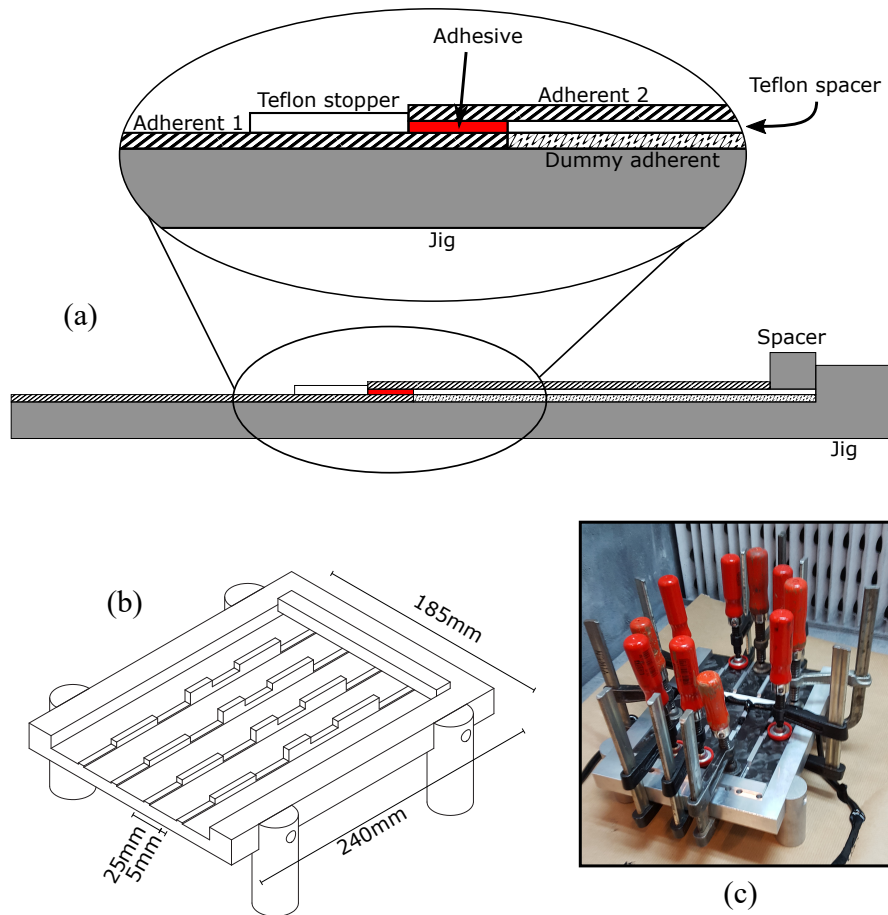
Jig used to create SLJ specimens. (a) Longitudinal cross-section of the jig while in use, illustrating how the correct geometry is obtained. (b) Global view of the jig with key measures. (c) Picture of the jig in use.
